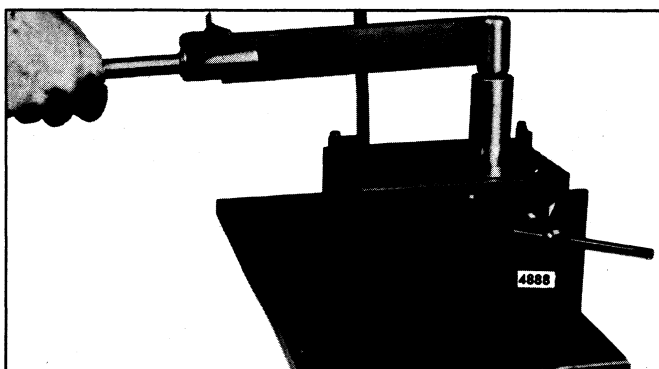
Tightening Injector Nut with Torque Wrench using Tool J 22799
